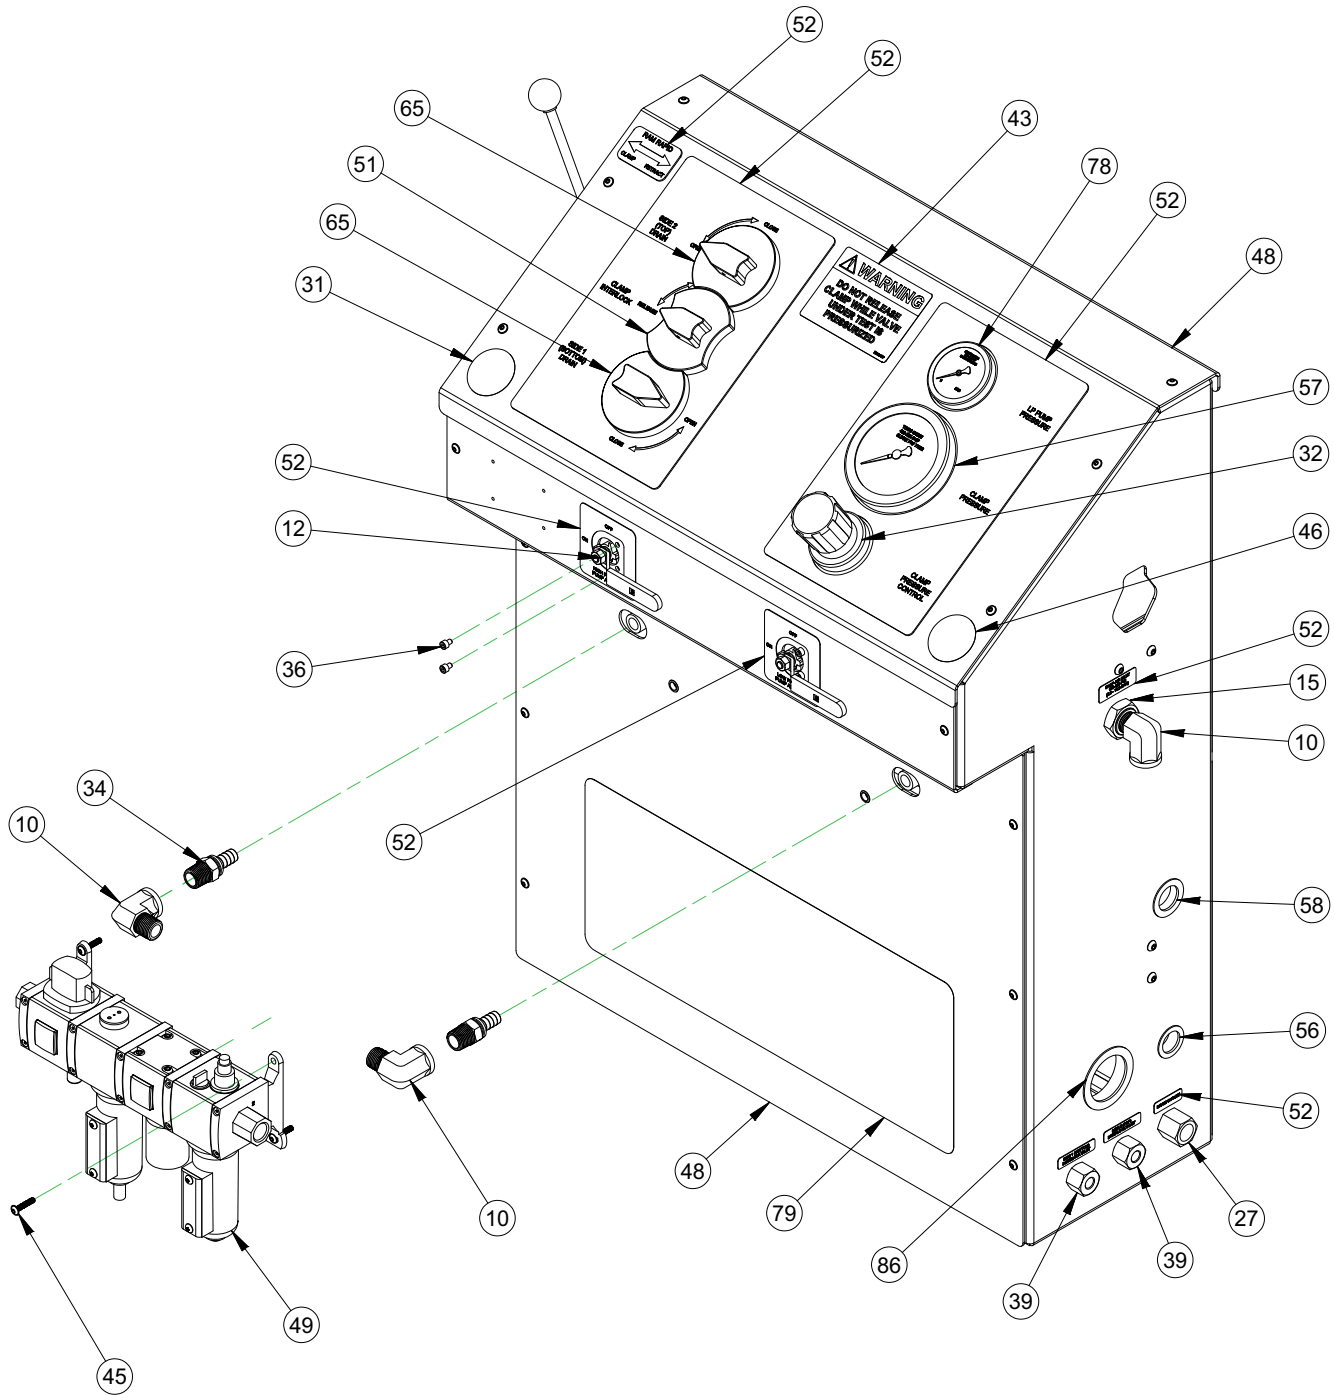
CONTROL CONSOLE USV ASSEMBLY FRONT (P/N 90326)
